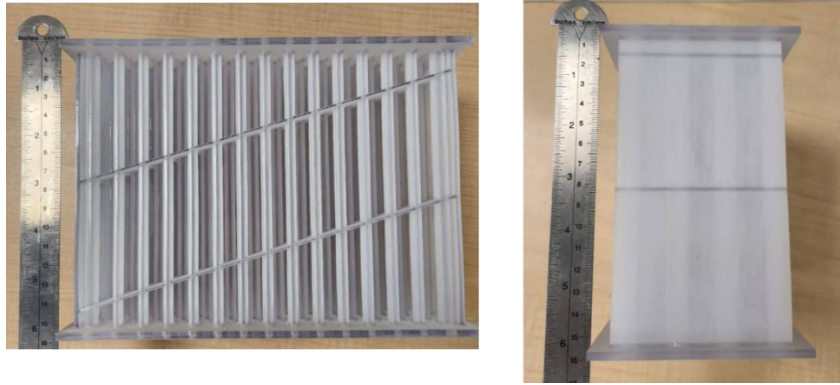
Polyjet Additively Manufactured AOHX Core (Left) Front View (Right) Side View
